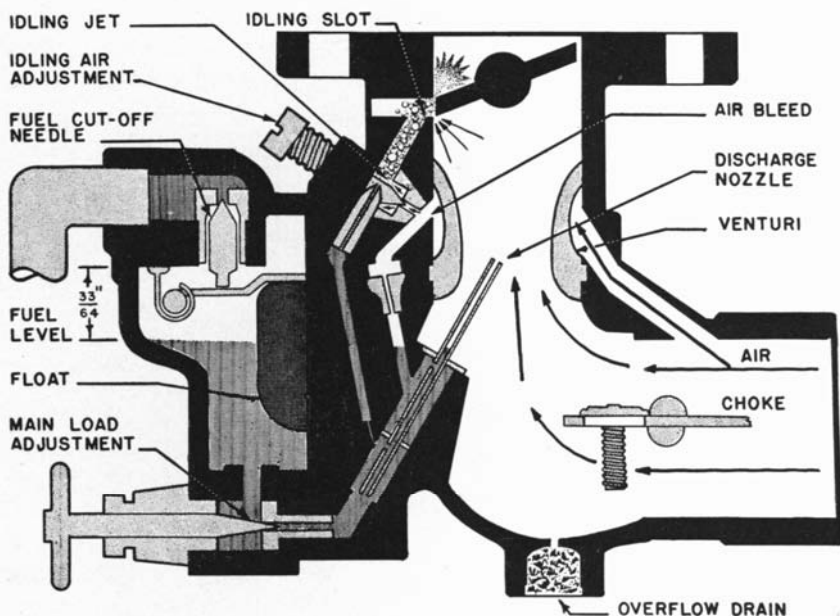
Air-bleeder tractor carburetor operating at idling speed
